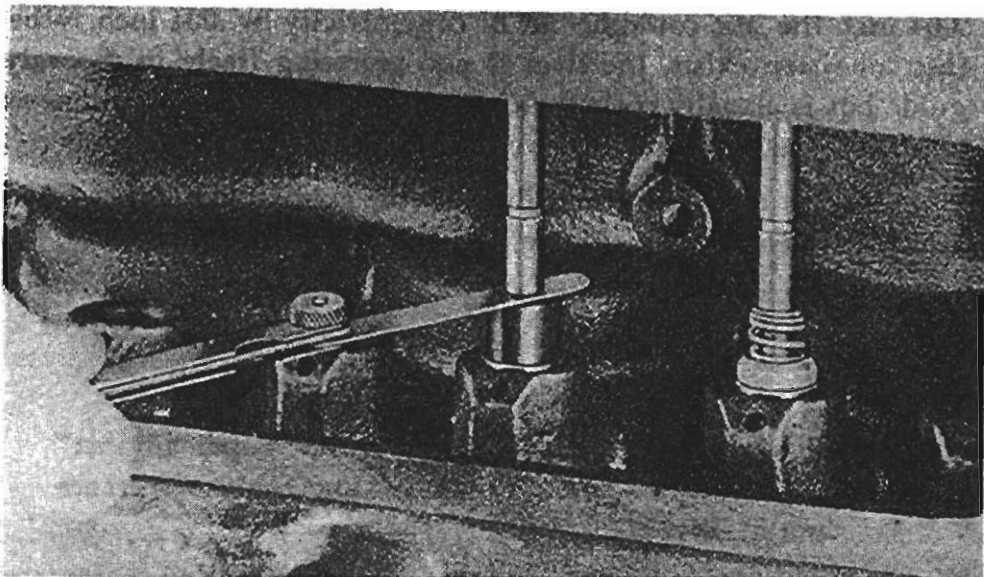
While Holding the Valve Down on Its Seat, Check the Clearance Between the Valve Stem and the Plug Gauge.
